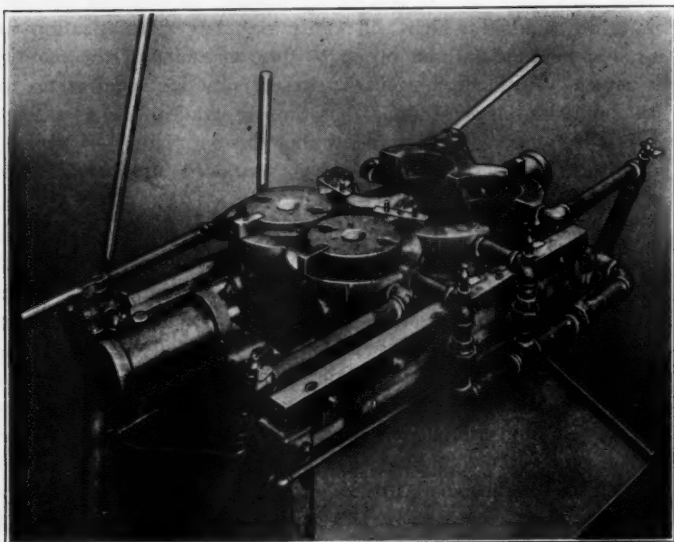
EXAMPLE OF A PERMANENT MOLD EQUIPMENT FOR CASTING FOUR DIFFERENTIAL MOUNTING CASTINGS AT EACH POURING
